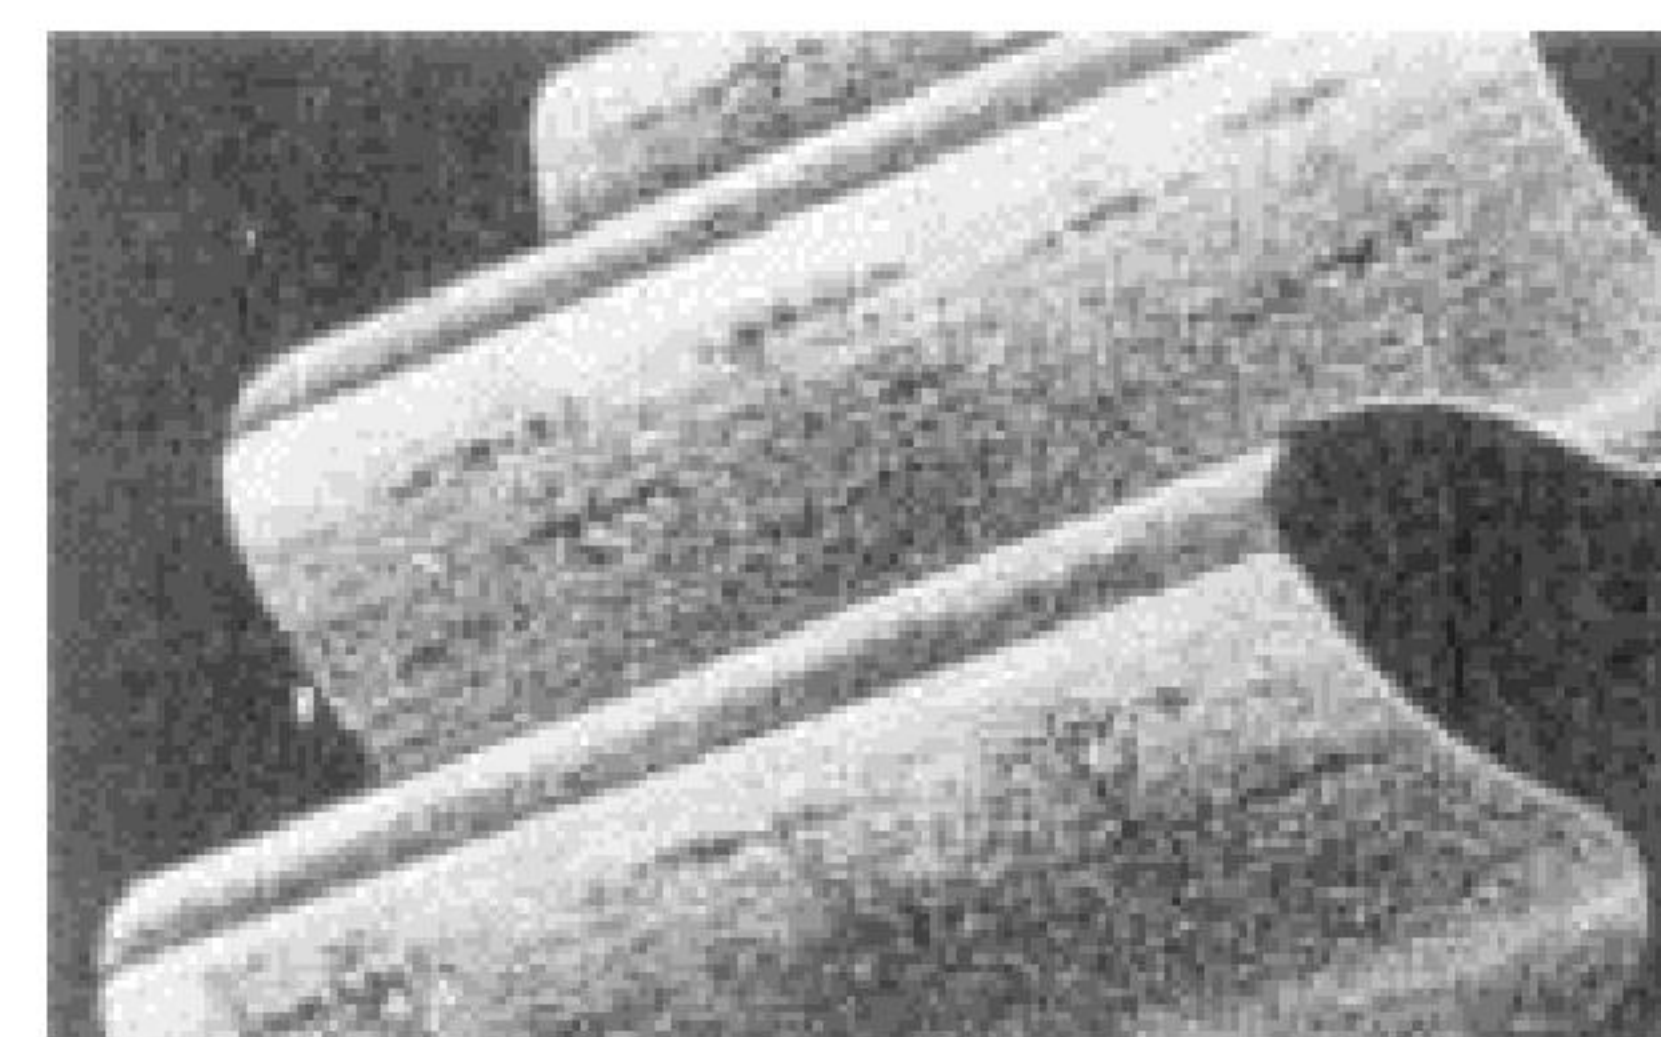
Initial pitting.FIGURE 9.23 Destructive pitting.
